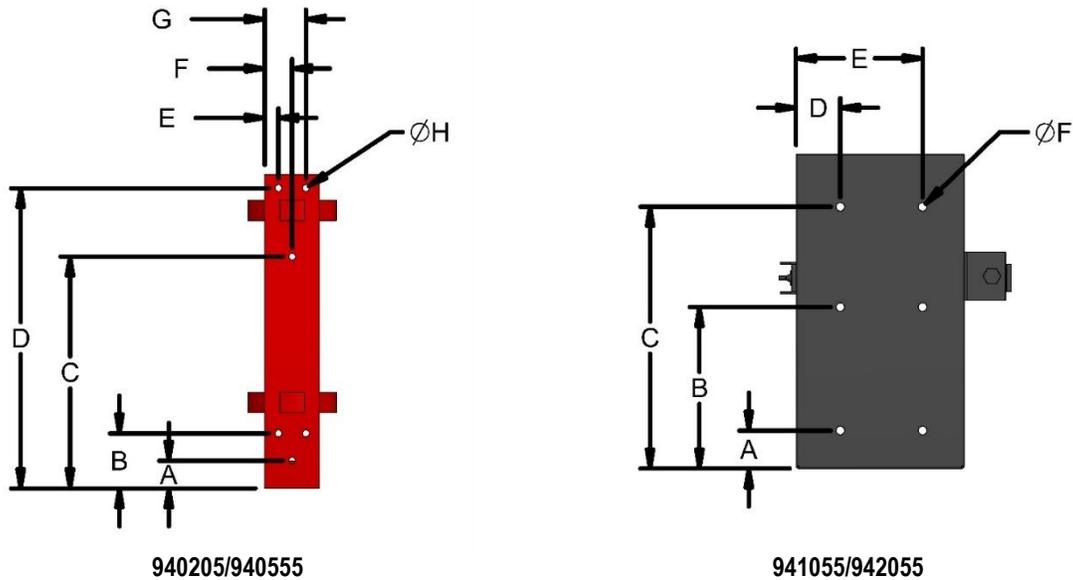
Cylinder Mounting Bracket Bolt Pattern
